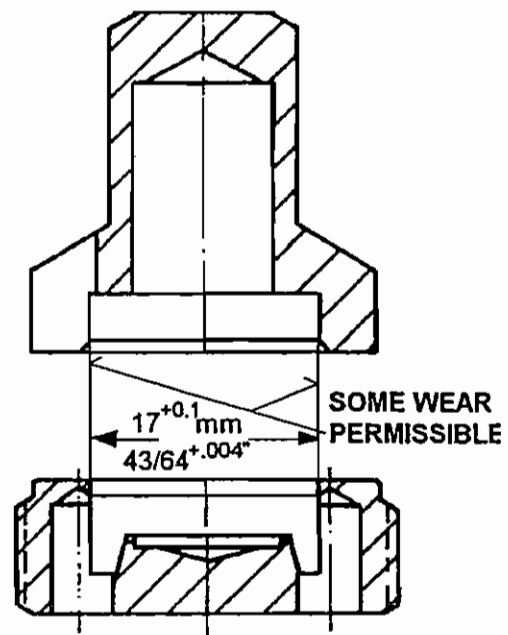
Permissible tolerances, valve body and cover
